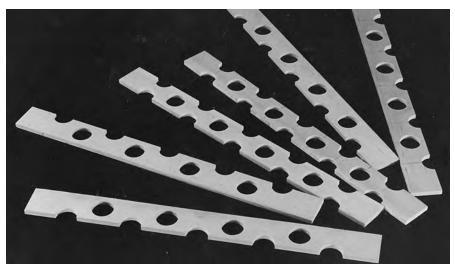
Strip-cutting, after drilling, produces individual pieces like these.
